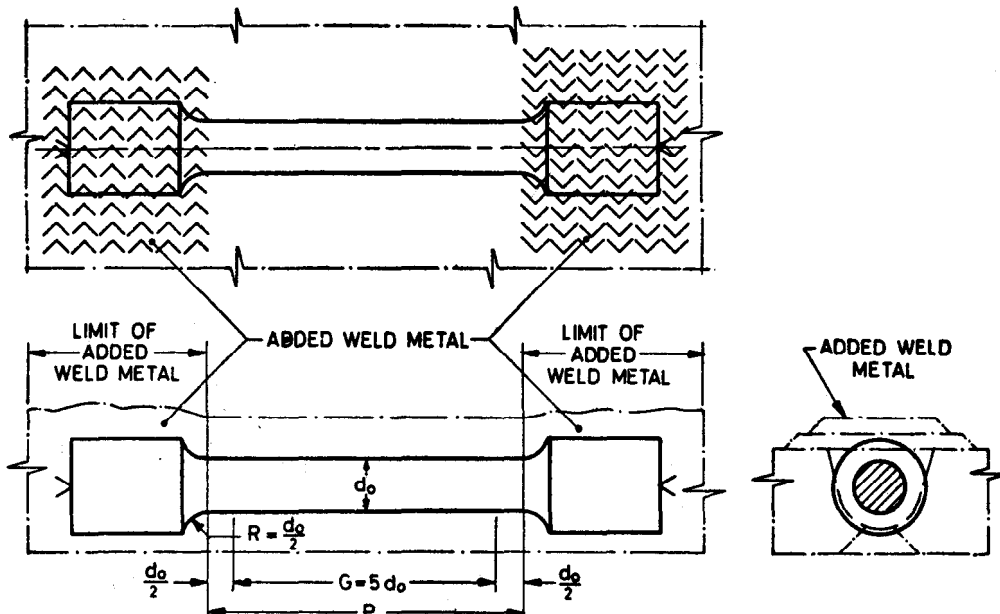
ALL-WELD METAL TENSILE TEST PIECE
